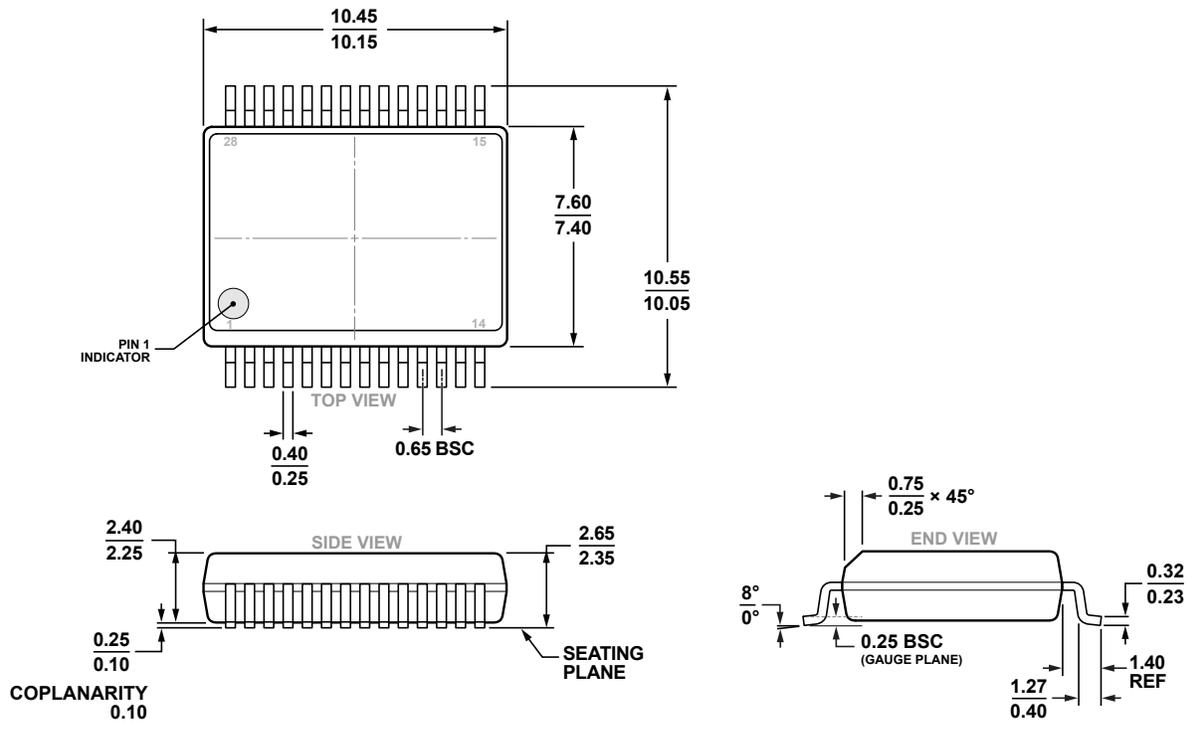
28-Lead Standard Small Outline, Wide Body, with Finer Pitch [SOIC\_W\_FP] (RN-28-1) Dimensions Shown in millimeters
